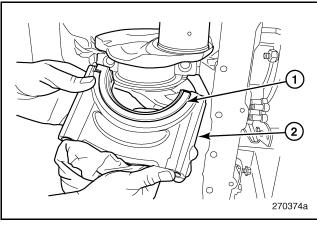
Main Bearing Cap/Thrust Washer Installation
